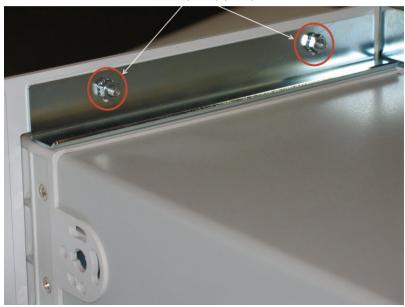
Rack-mount Series 2100 and Model 3390 instrument to chassis screws
